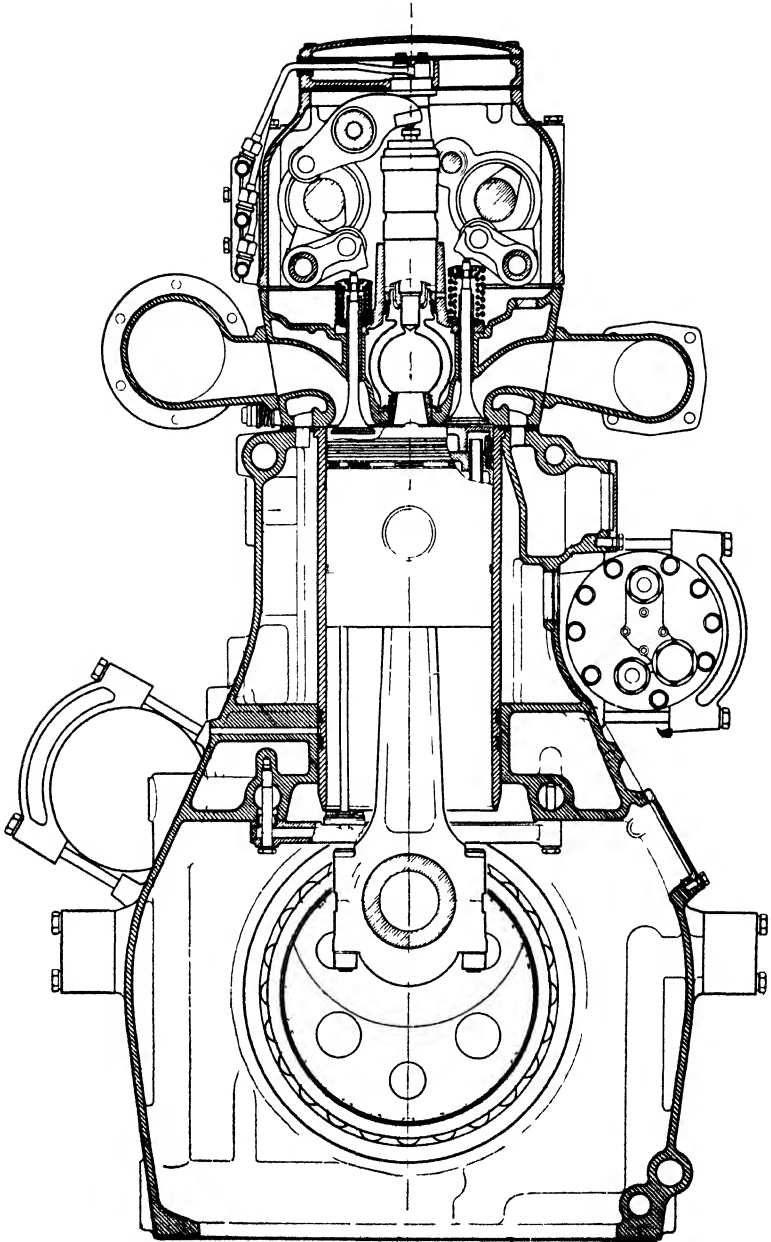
CROSS SECTION OF MAYBACH SIX-CYLINDER ENGINE.
